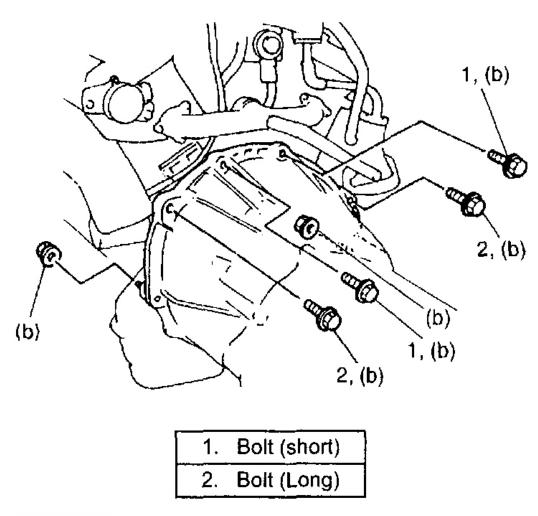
Exploded View Of Engine Side Mounting Brackets Courtesy of SUZUKI OF AMERICA CORP.
